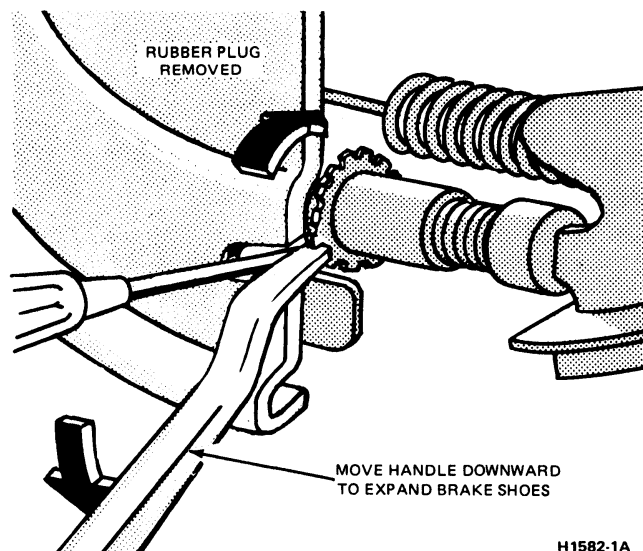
Expanding Brake Shoes—F-250-350, E-250—350 Rear
